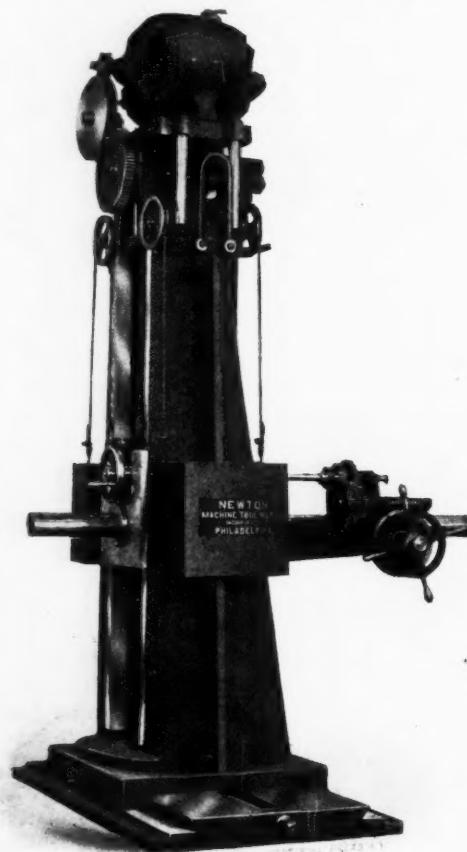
Newton Portable Boring, Drilling and Milling Machine.
